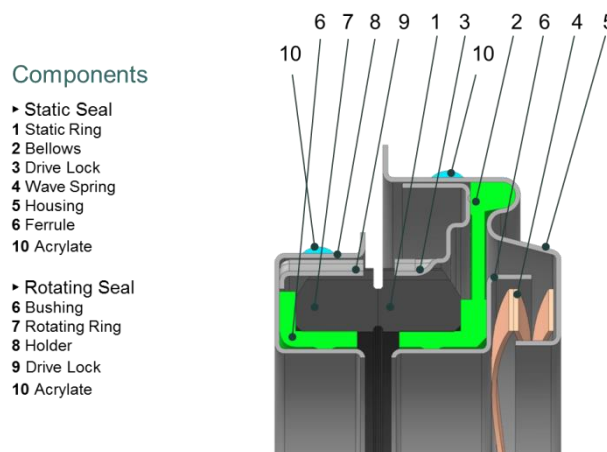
Design of KACO Electric Motor Rotors-shaft Seal (EMRS)
